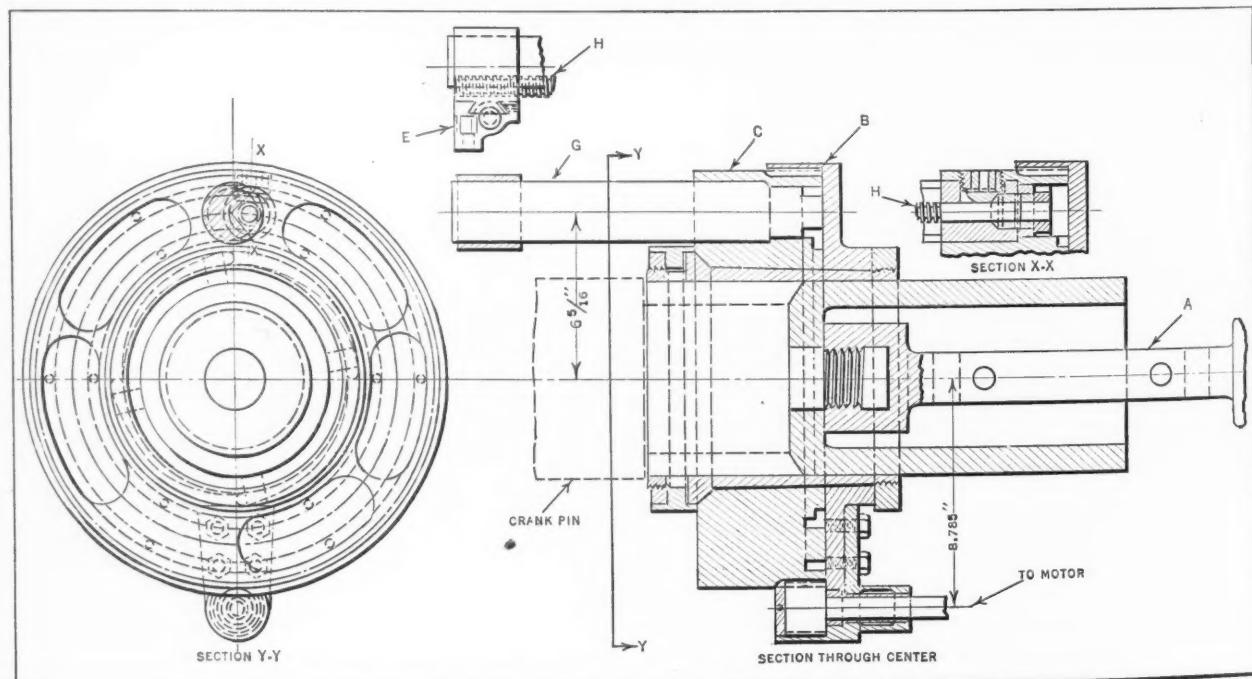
Sectional Views of Machine Shown in Fig. 1
